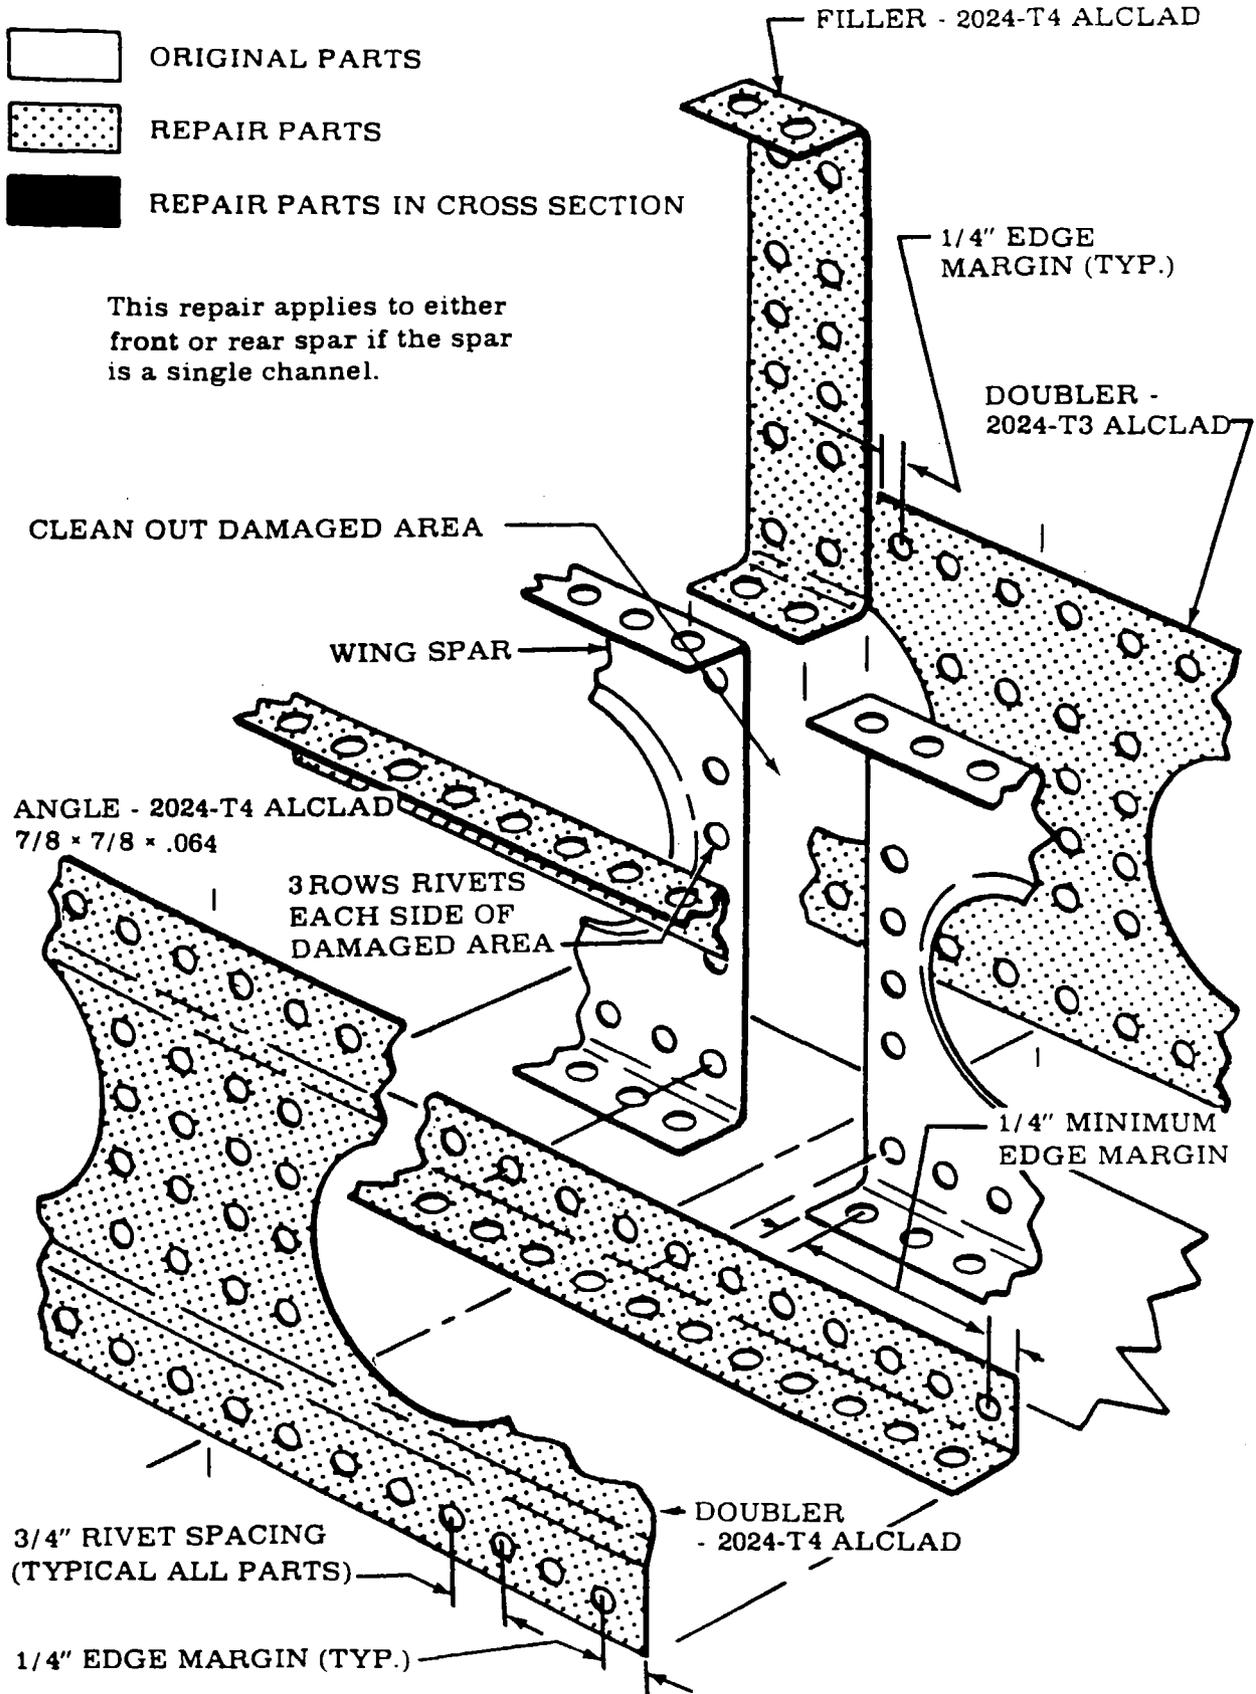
Wing Spar Repair (Sheet 2 of 4)
